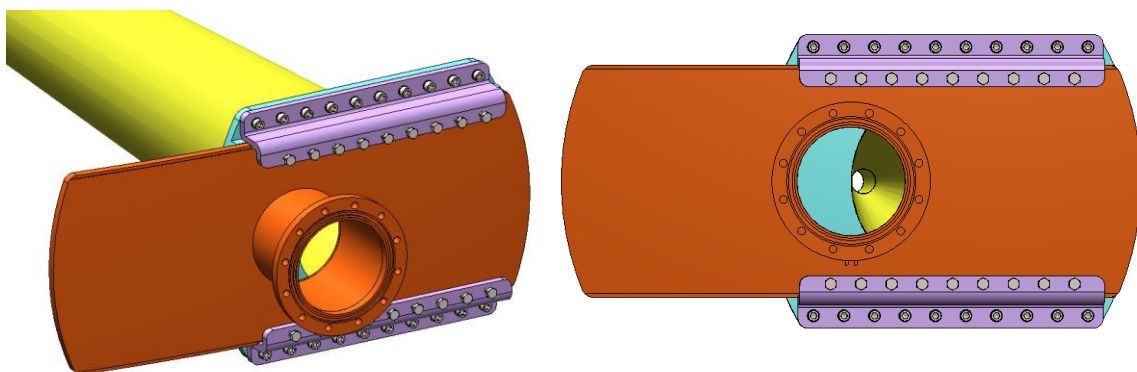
Position of $2,5^\circ$ of the tilting weldment
